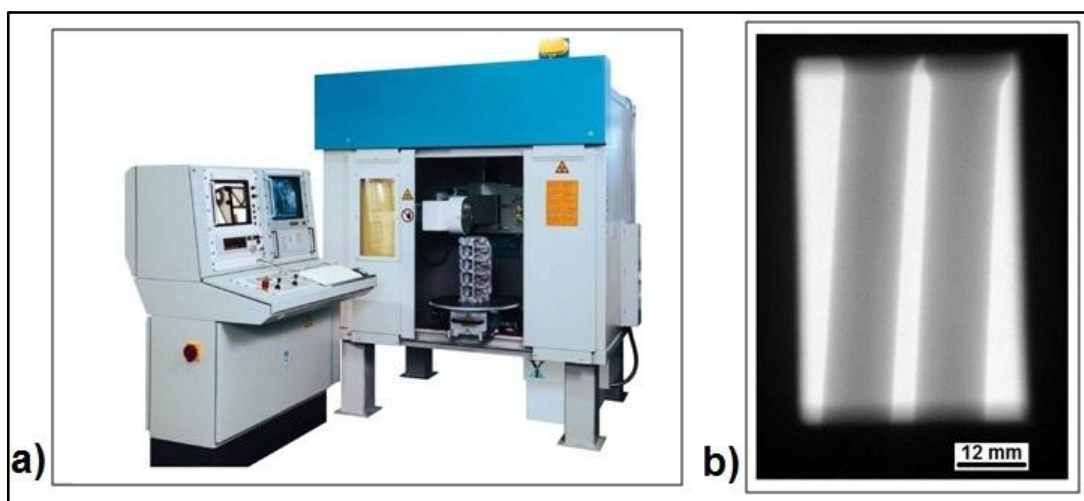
a) X-Ray inspection [NN12], b) X-Ray photograph of two $d_0=12 \text{ mm}$ tensile test specimens.
